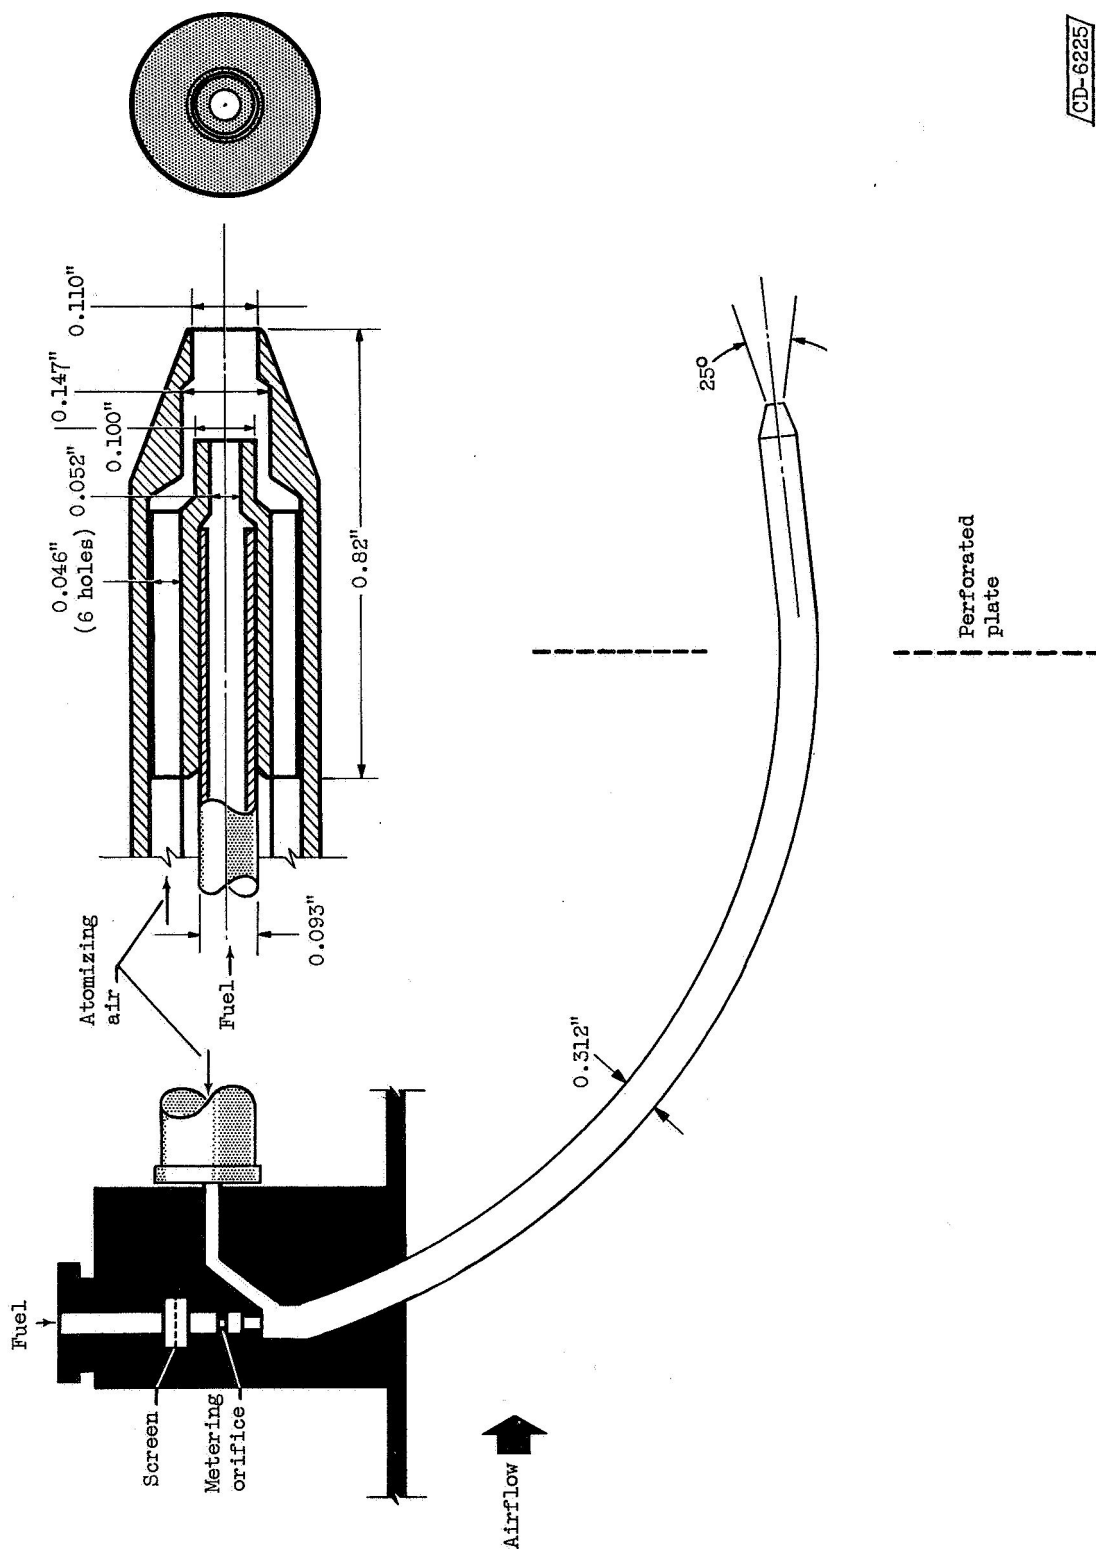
Hydrocarbon-fuel nozzle assembly.
